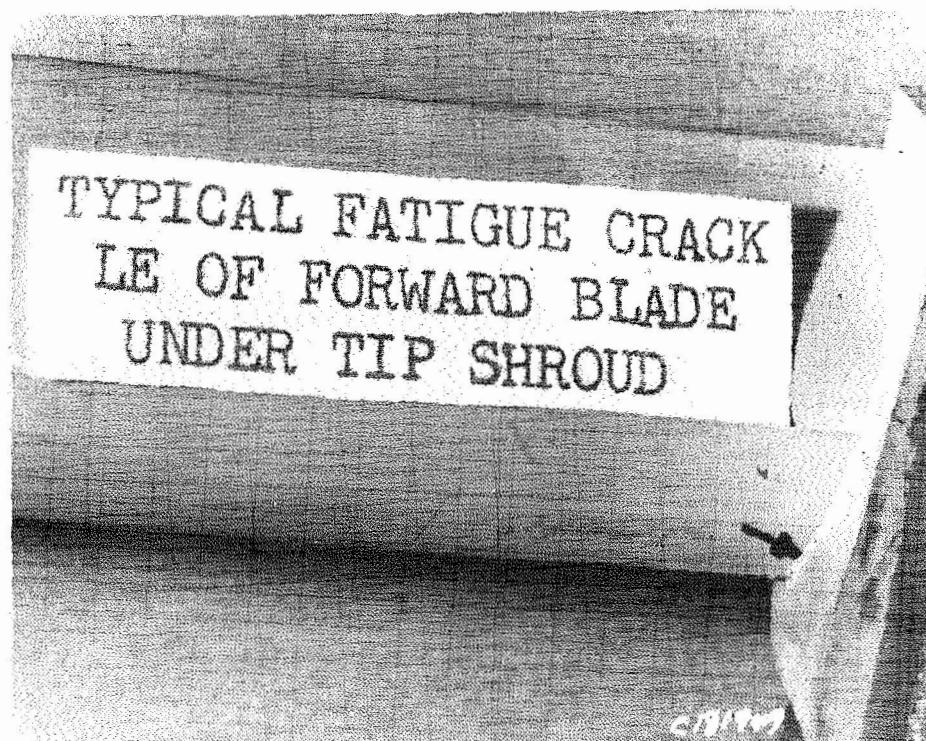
Fatigue Endurance Test Blade Failure,
